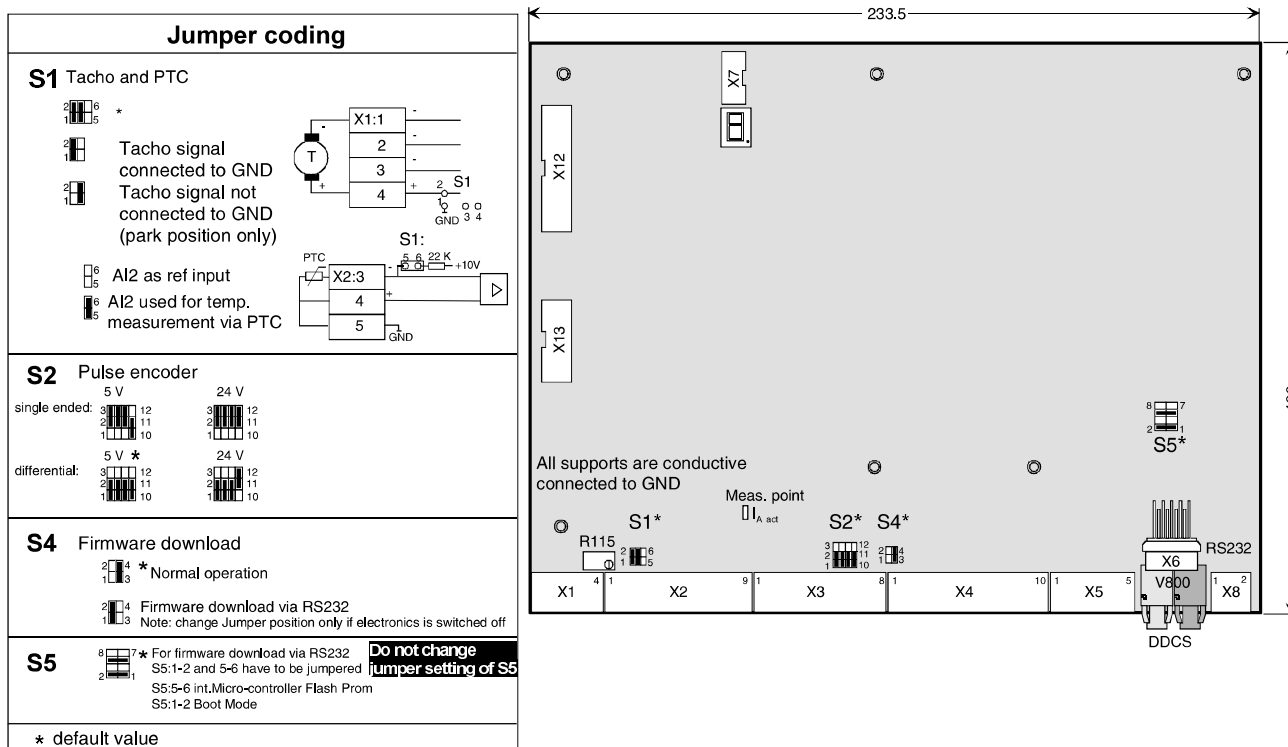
/1 Layout of the control board SDCS-CON-3A
